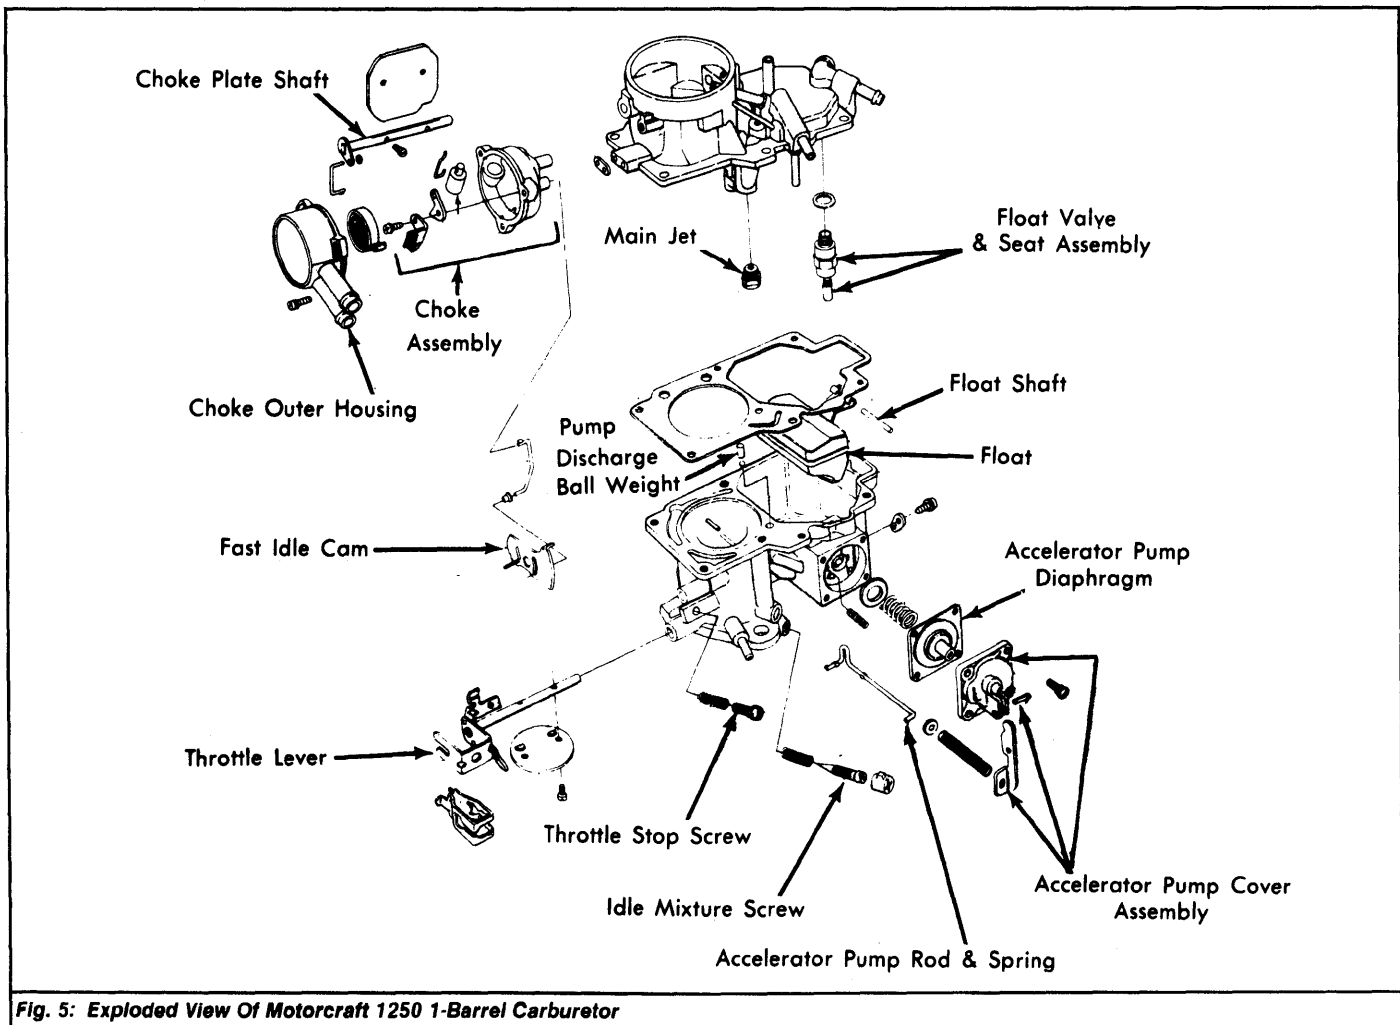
Exploded View Of Motorcraft 1250 1-Barrel Carburetor
